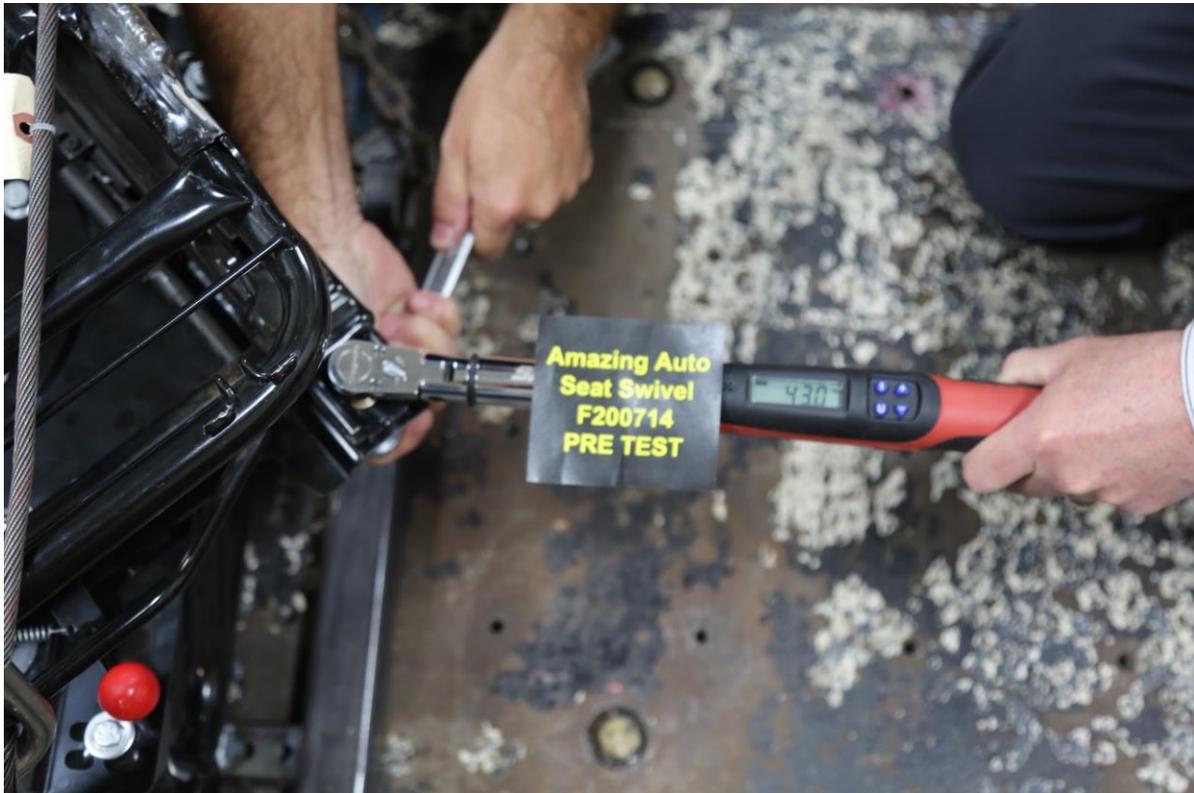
Swivel Attachment – Demonstrating Bolt Torque
